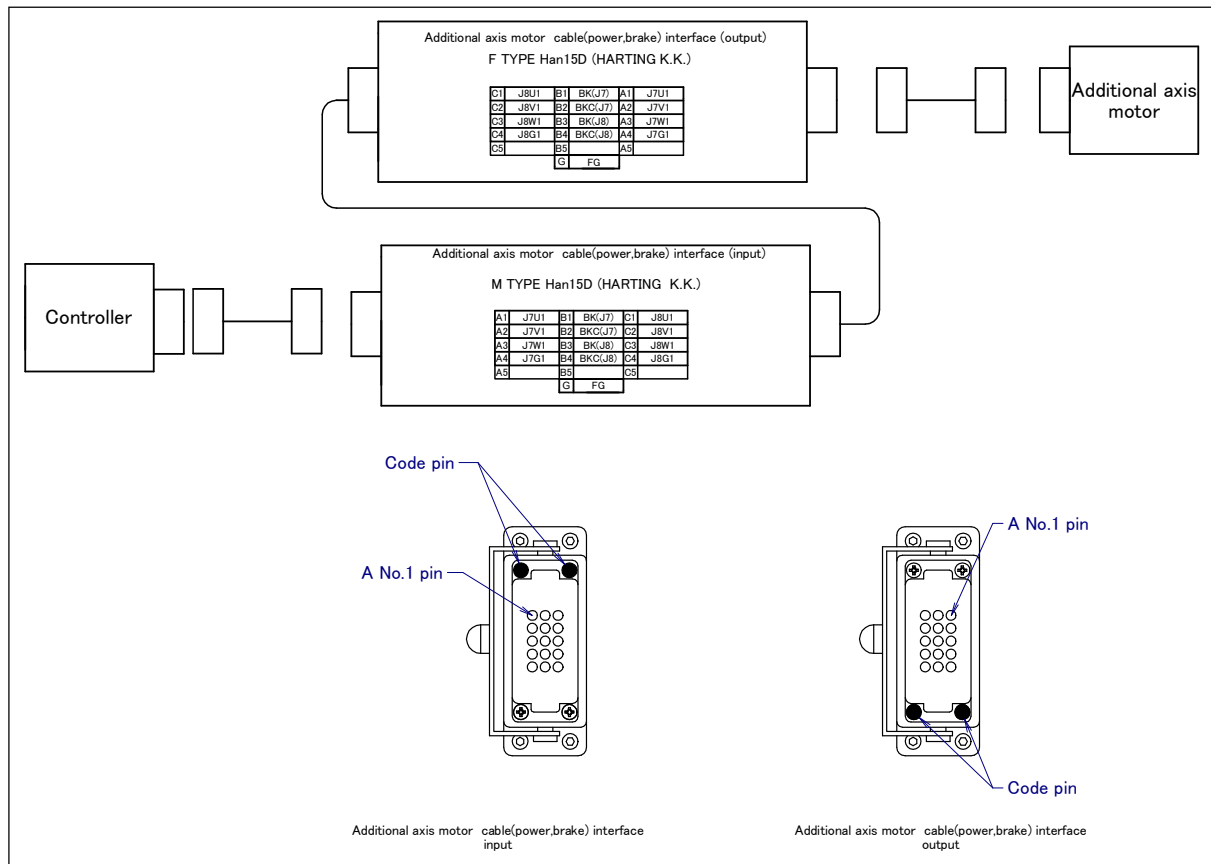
(m) Pin layout of the additional axis motor cable (power, brake) (ARM) interface and layout position of the code pin (option)
